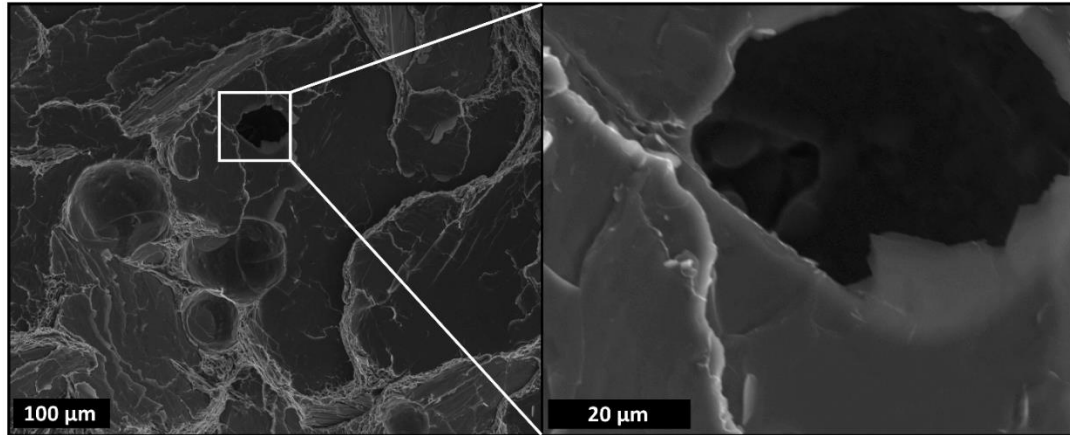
Brittle 4047 fracture surface. Enlarged image of porosity in brittle region shown at right.
